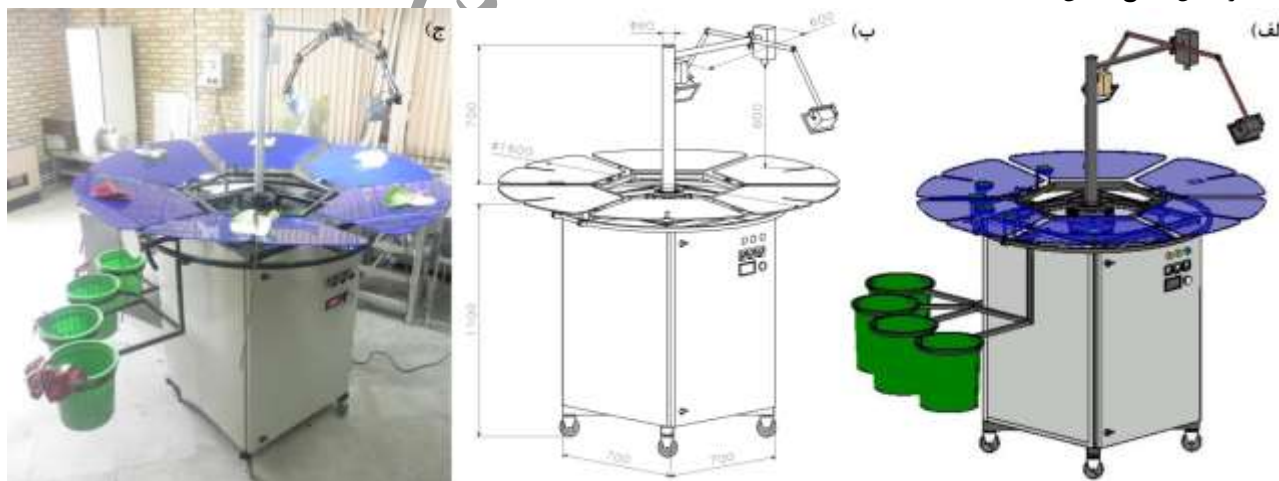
a) CAD model, b) Dimensions (mm), c) Real image of the flowers grading machine
